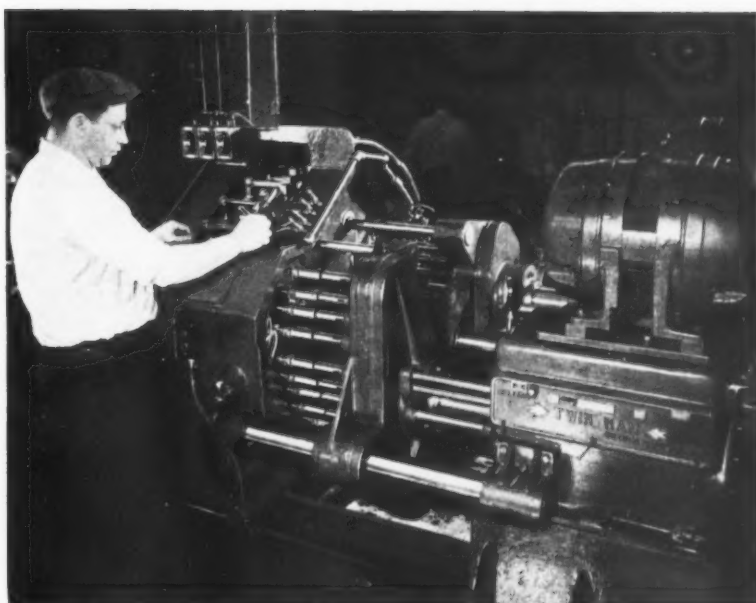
Drilling and Reaming the Bolt Holes of Plymouth Connecting-rods and Drilling a Dowel Hole
